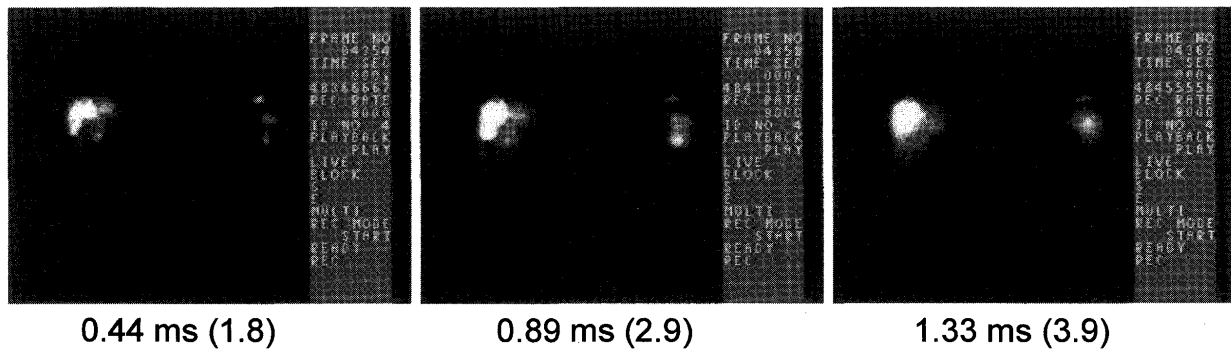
Examples of observed photos of molten pool and reflected laser beam during laser welding of Zn-coated steel sheets with 0 mm gap. Elapsed time (monitored intensity)
